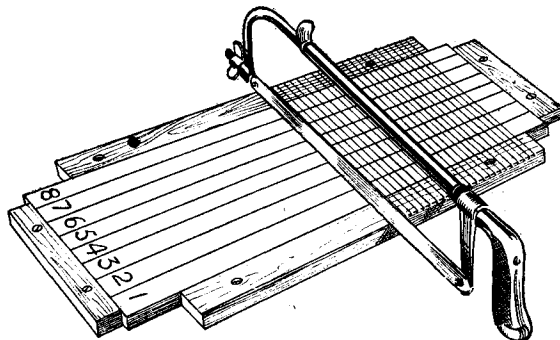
Marking out and cutting the grooves in the supporting strips.
